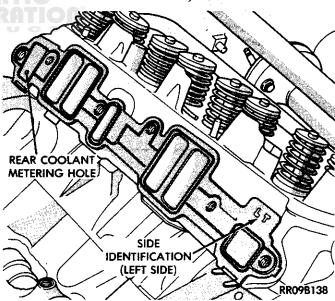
Intake Manifold Side Gaskets (5.2L Left Side Shown)
